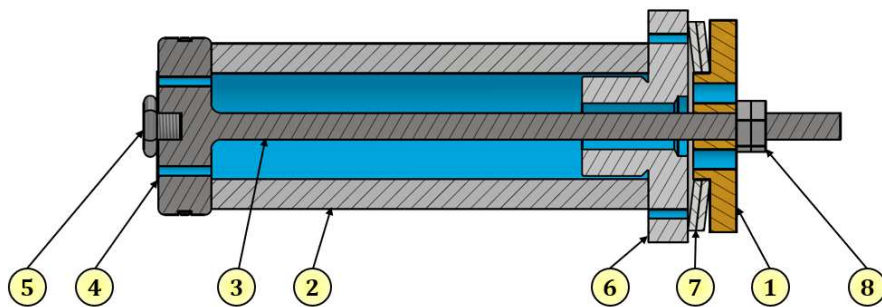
Longitudinal section view of the ring stack actuator – piston assembly, with blue indicating the low-pressure fluid pathway.
